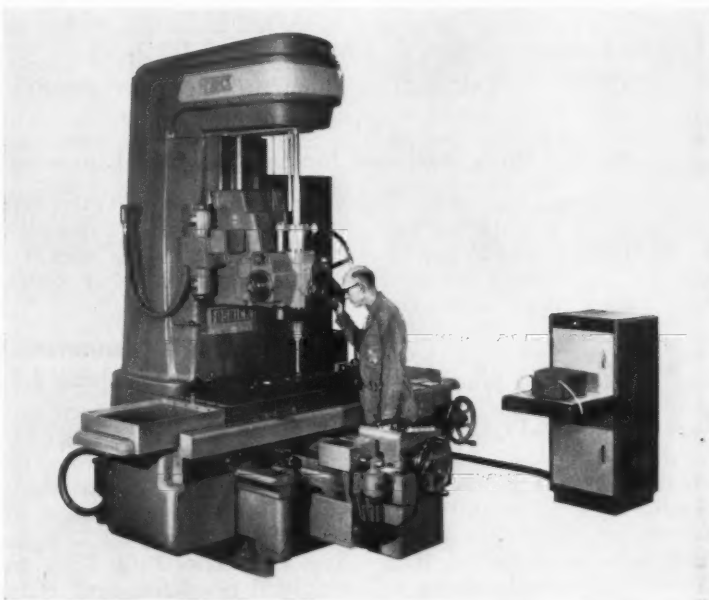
"Fosmatic" tape-controlled jig borer that allows complete programming of table positions and spindle feeds and speeds.
